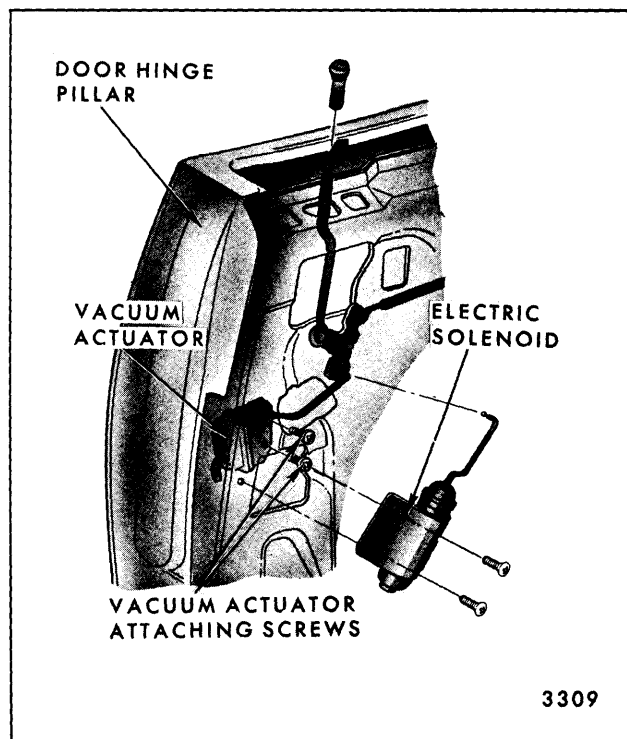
Rear Door Lock Vacuum Actuator or Electric Solenoid Installation
